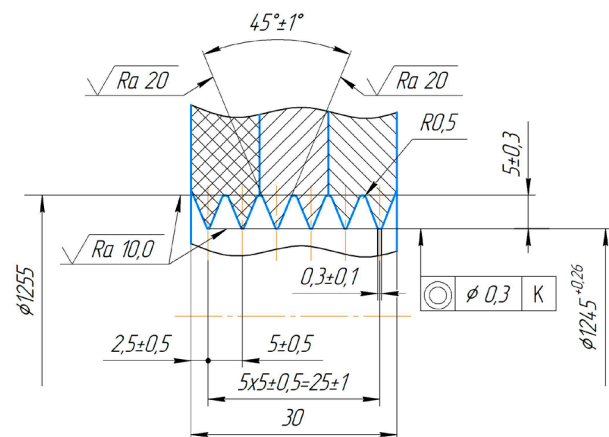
Drawing of the steel seal of the shield (view B, Fig. 11)
